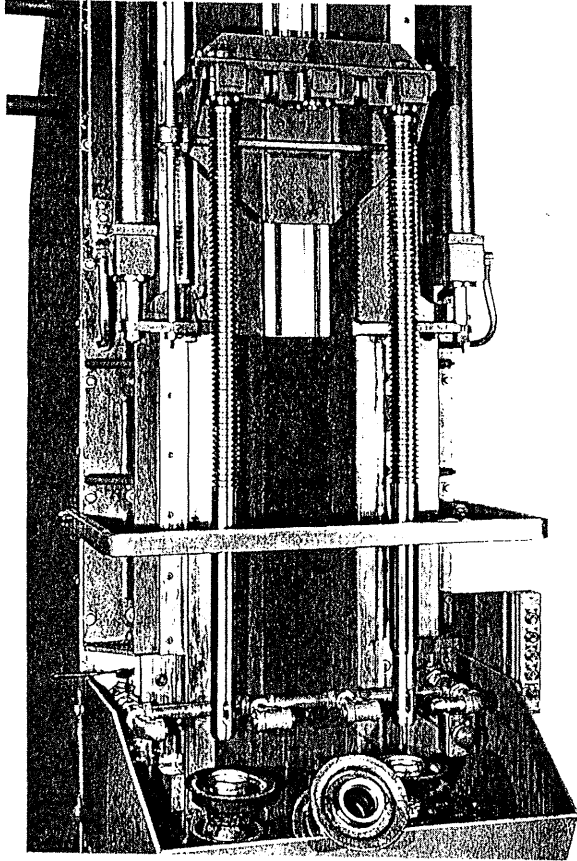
Vertical pull-down broaching machine shown with parts in position ready for the two broaches to be inserted. An extra part is shown lying at the front of the machine.
